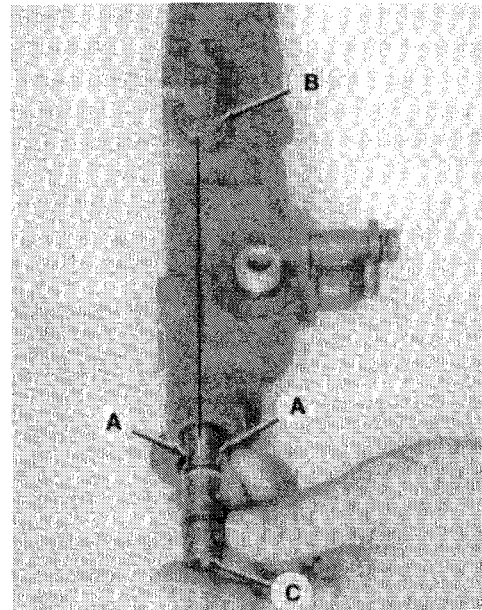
When reinstalling pressure regulator valve sleeve (C), position sleeve so pressure inlet holes (A) are not aligned with seat valve inlet port (B).
